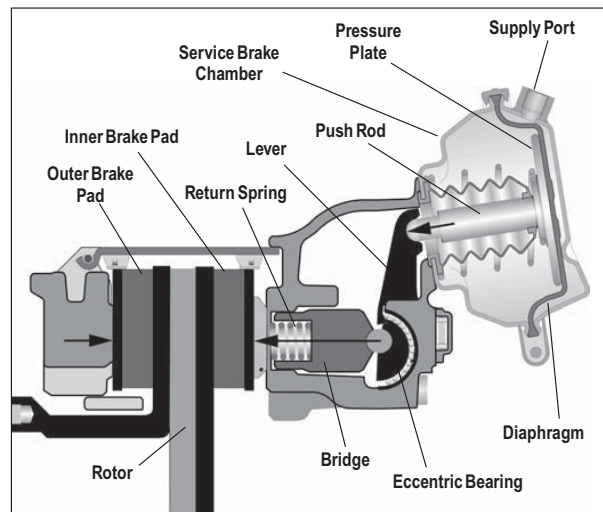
CROSS-SECTION VIEW SHOWING BRAKE OPERATION
